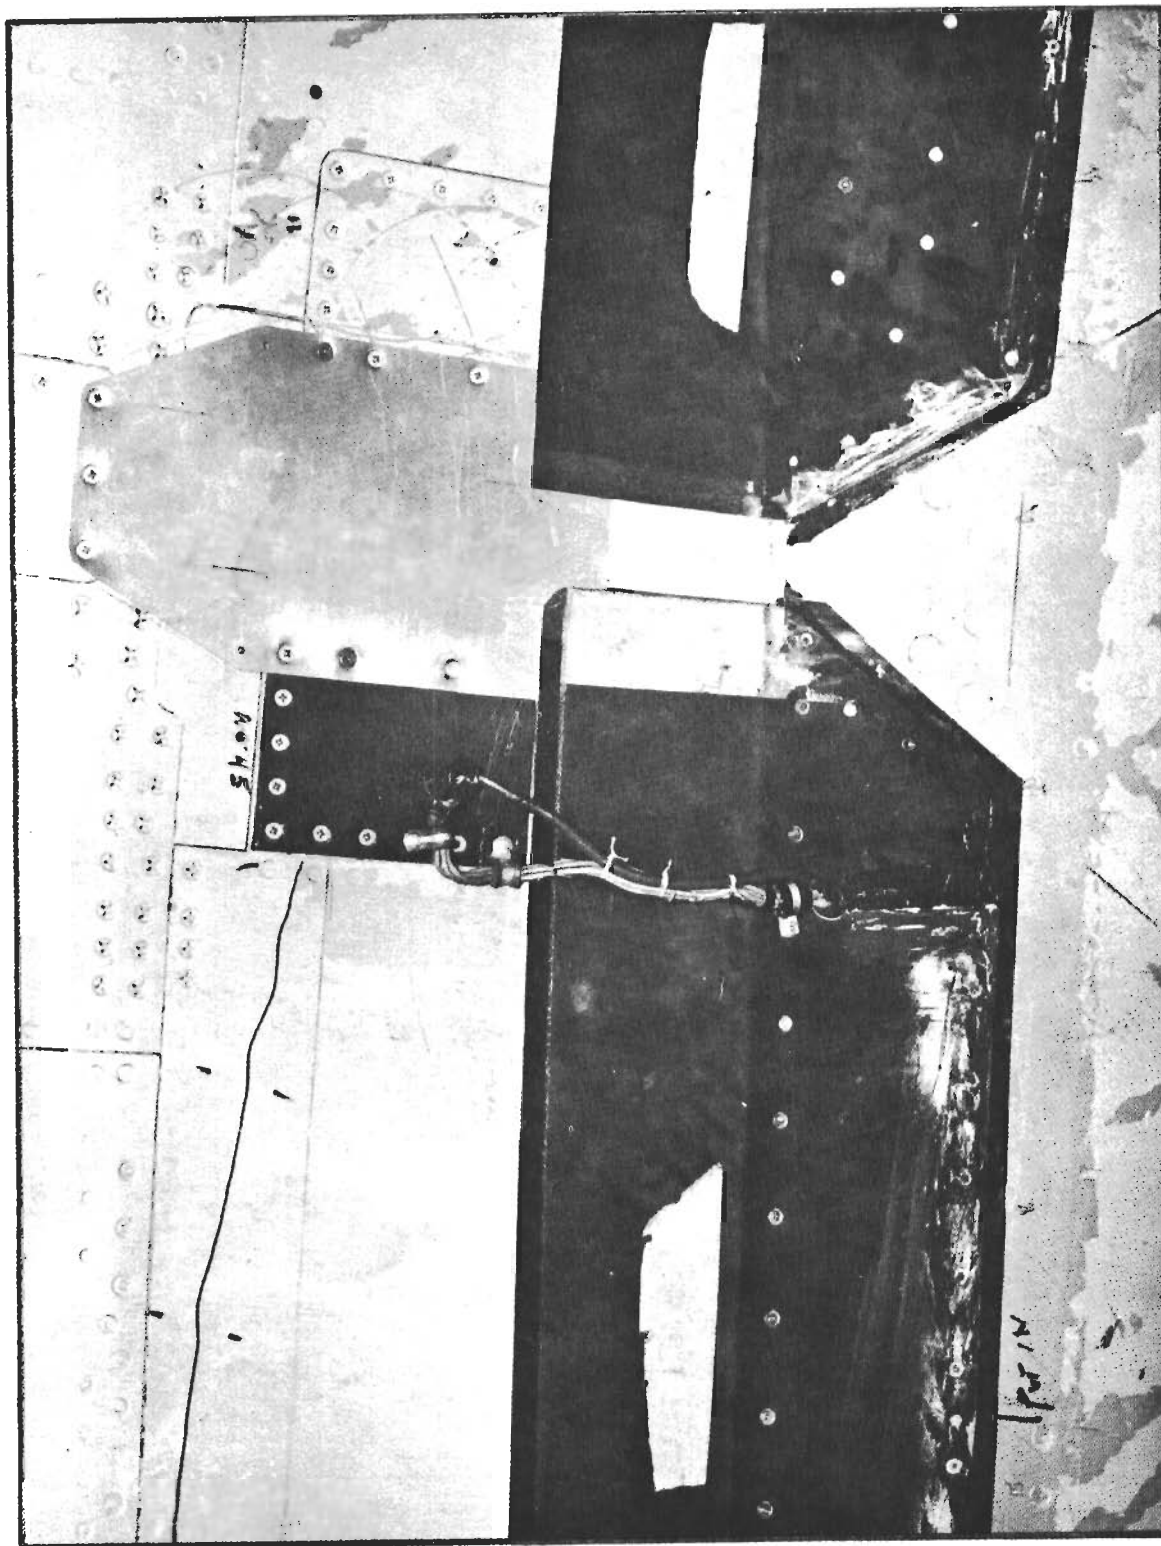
Installation Details of Pressure Instrumentation on Bottom Surface of Left Wing Near Wing Station 95
